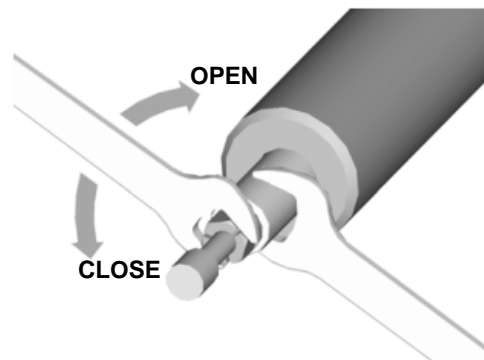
Changing the grinding tool RL3040, RL 2732, RL 3622, RL 3030
